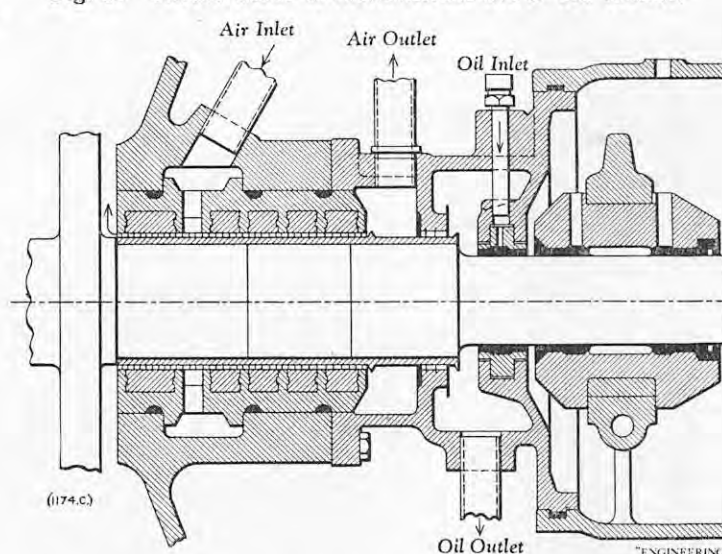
SEALING GLAND AT HIGH-PRESSURE END OF GAS TURBINE.
